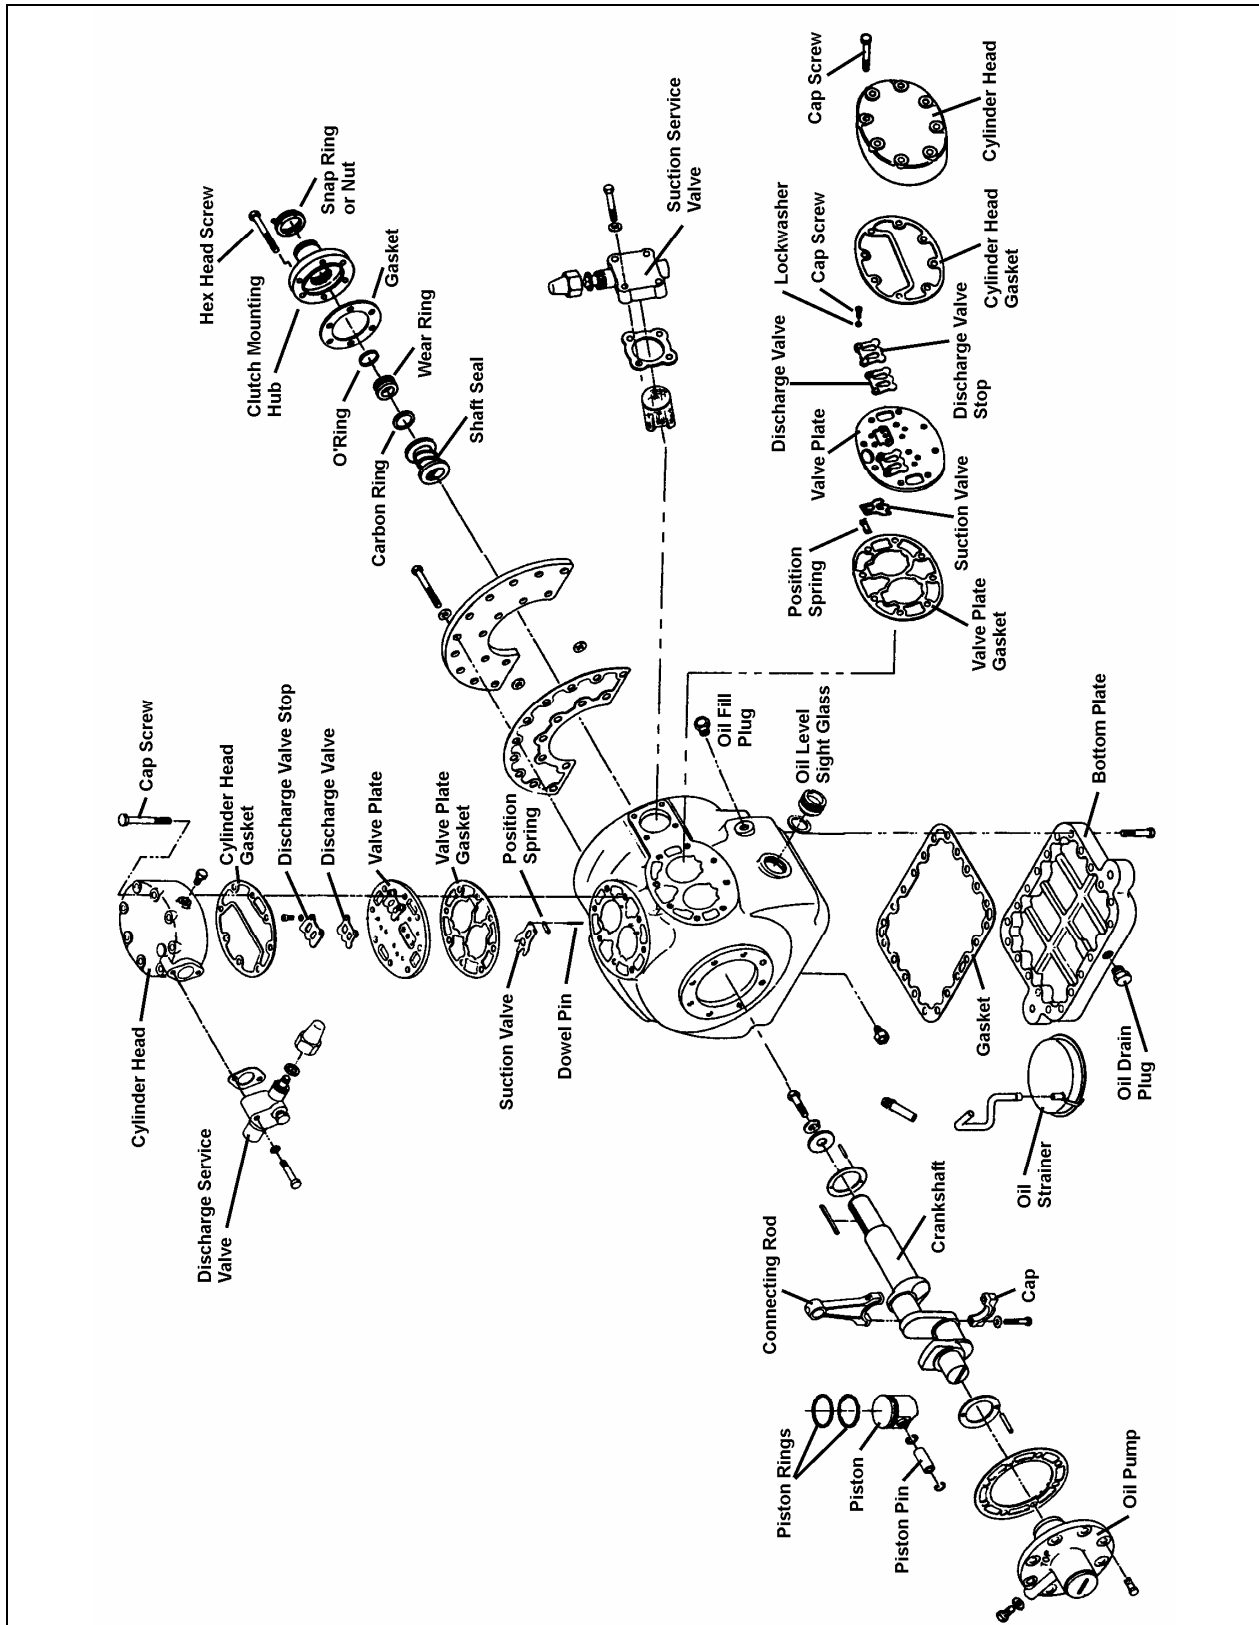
EXPLODED VIEW OF 05G COMPRESSOR
